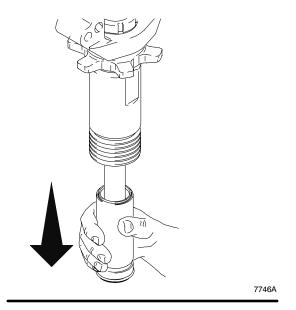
Invert piston rod and sleeve and pound on hard surface until piston rod comes out of sleeve.
